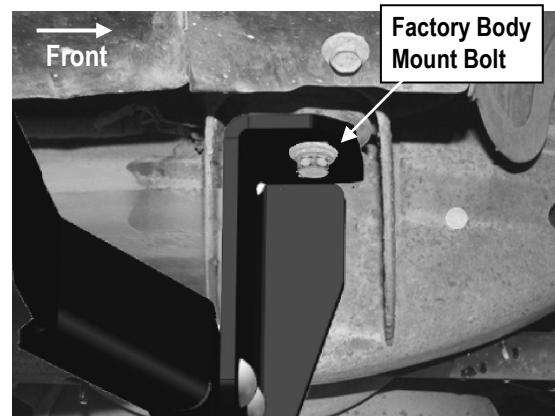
Passenger Rear Mounting Bracket Assembly (DFM +PRB)
